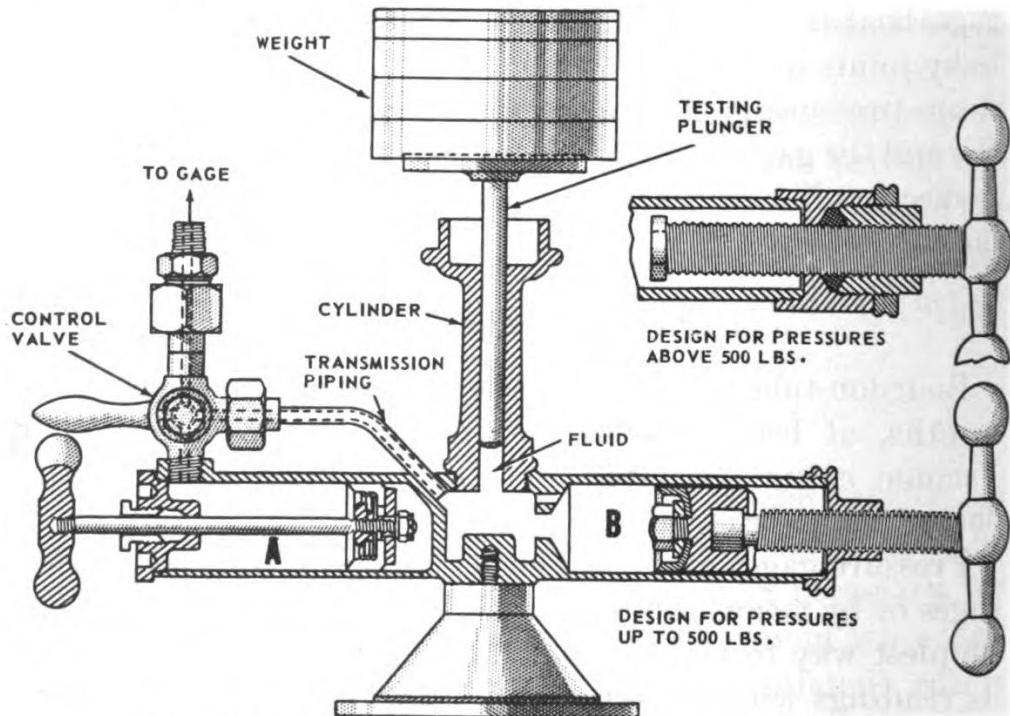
Dead-weight pressure gage testing apparatus.
